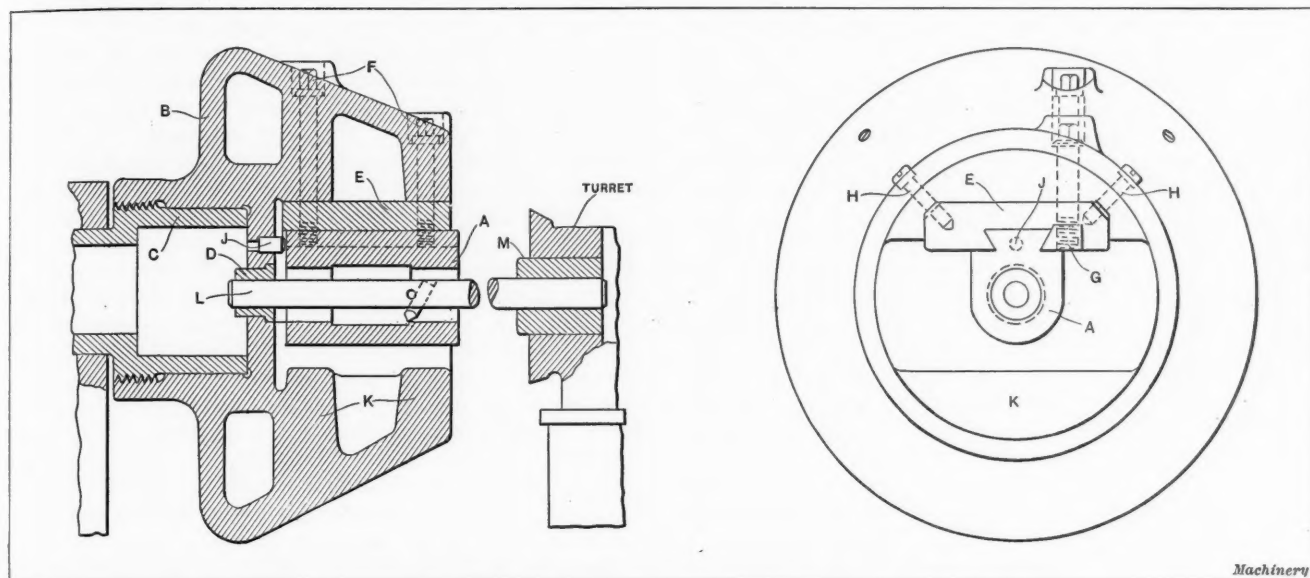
Fixture for boring Small Bronze Castings on Horizontal Turret Lathe
